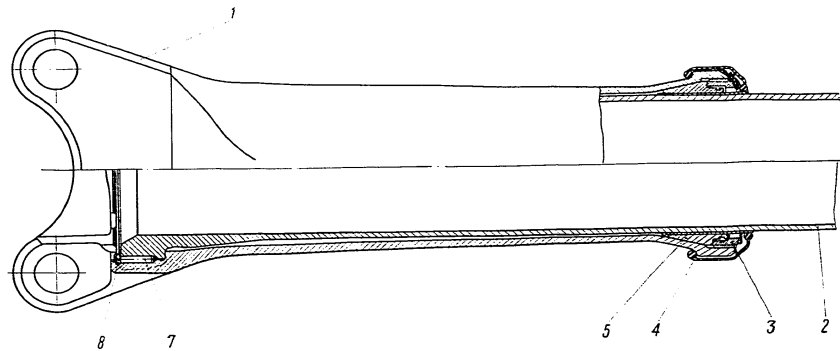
BLADE ROOT ATTACHMENT FITTING
